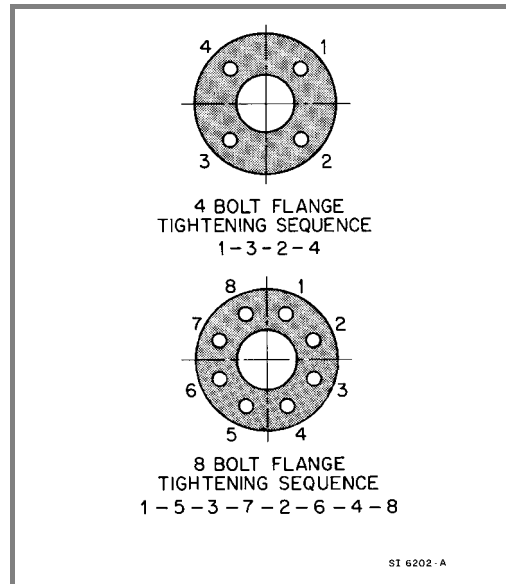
FLANGE BOLT TIGHTENING SEQUENCE
